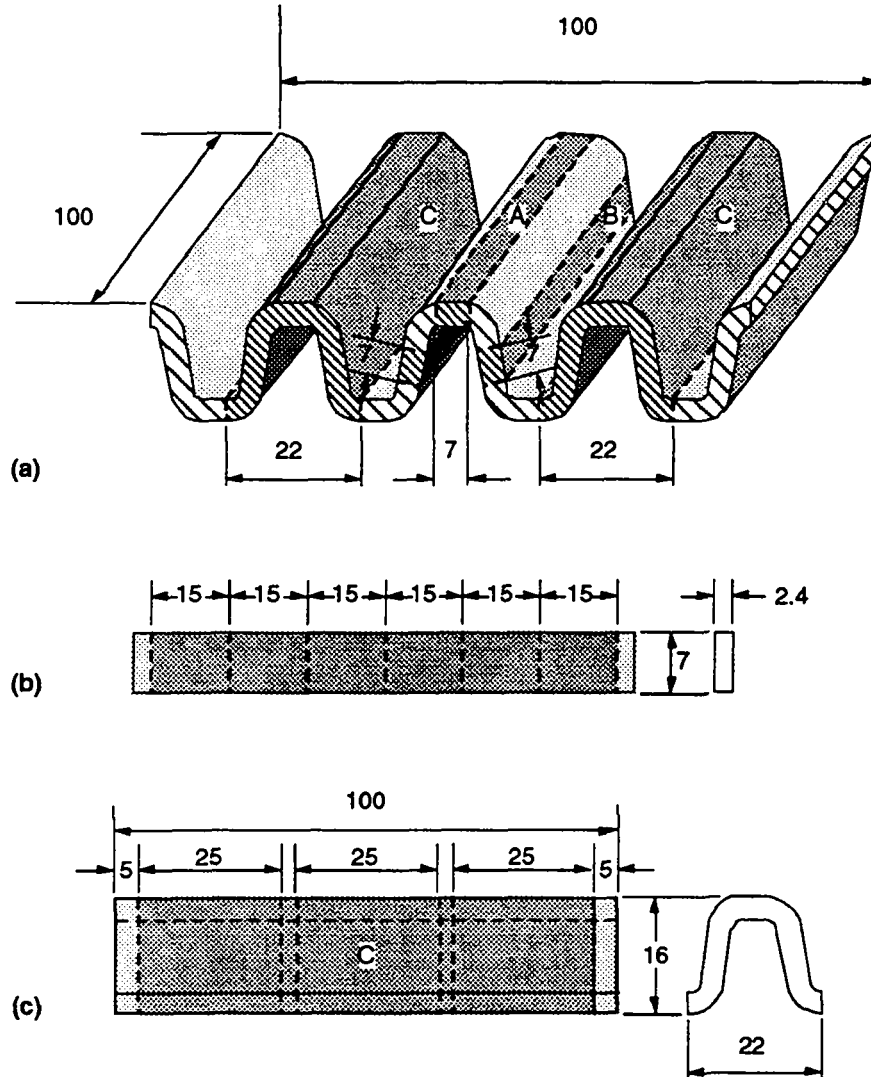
Samples cut out of each part (shadowed areas): (a) samples A, B, and C; (b) samples A and B were cut into  $7 \times 15 \text{ mm}^2$  specimens for ILSS tests; and (c) the edges of samples C were trimmed and 25 mm long parts were cut for compression testing.
